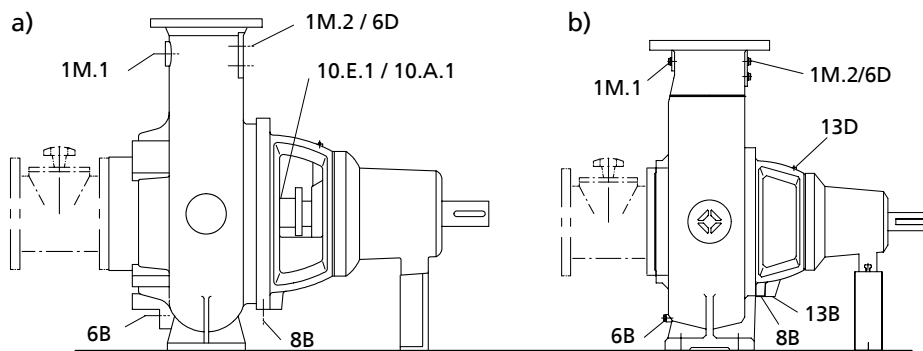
Auxiliary connections: a) Pump with gland packing, b) Pump with mechanical seal
